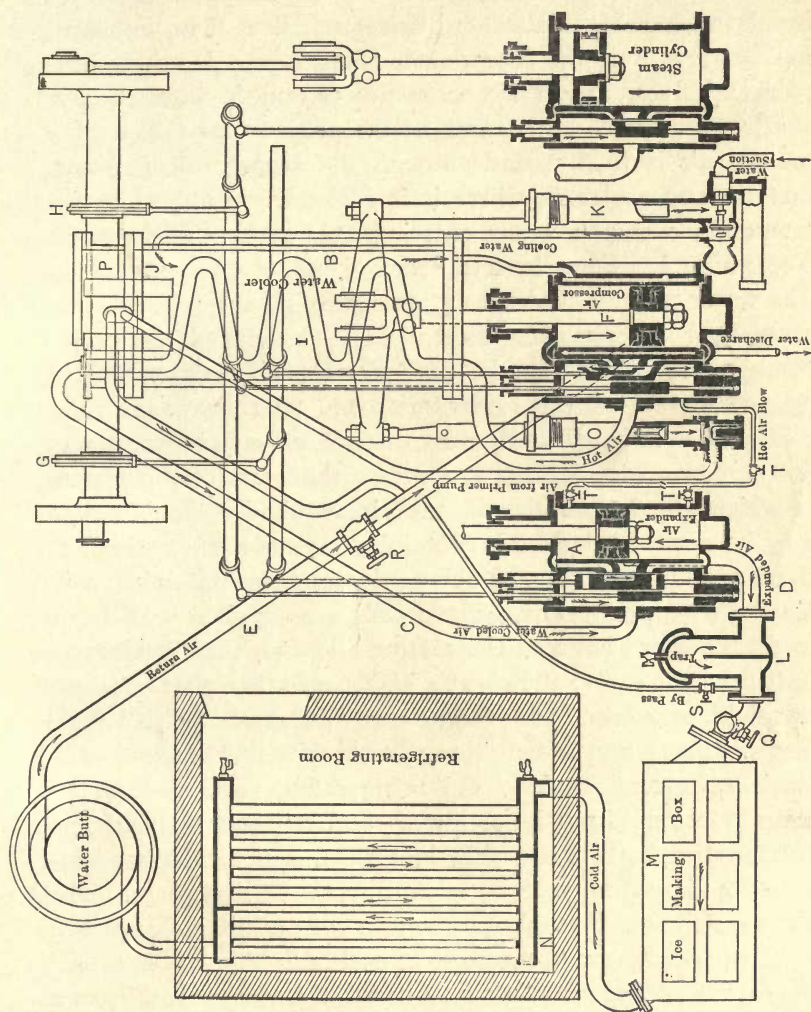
Allen Dense Air Machine of H. B. Roelker.
